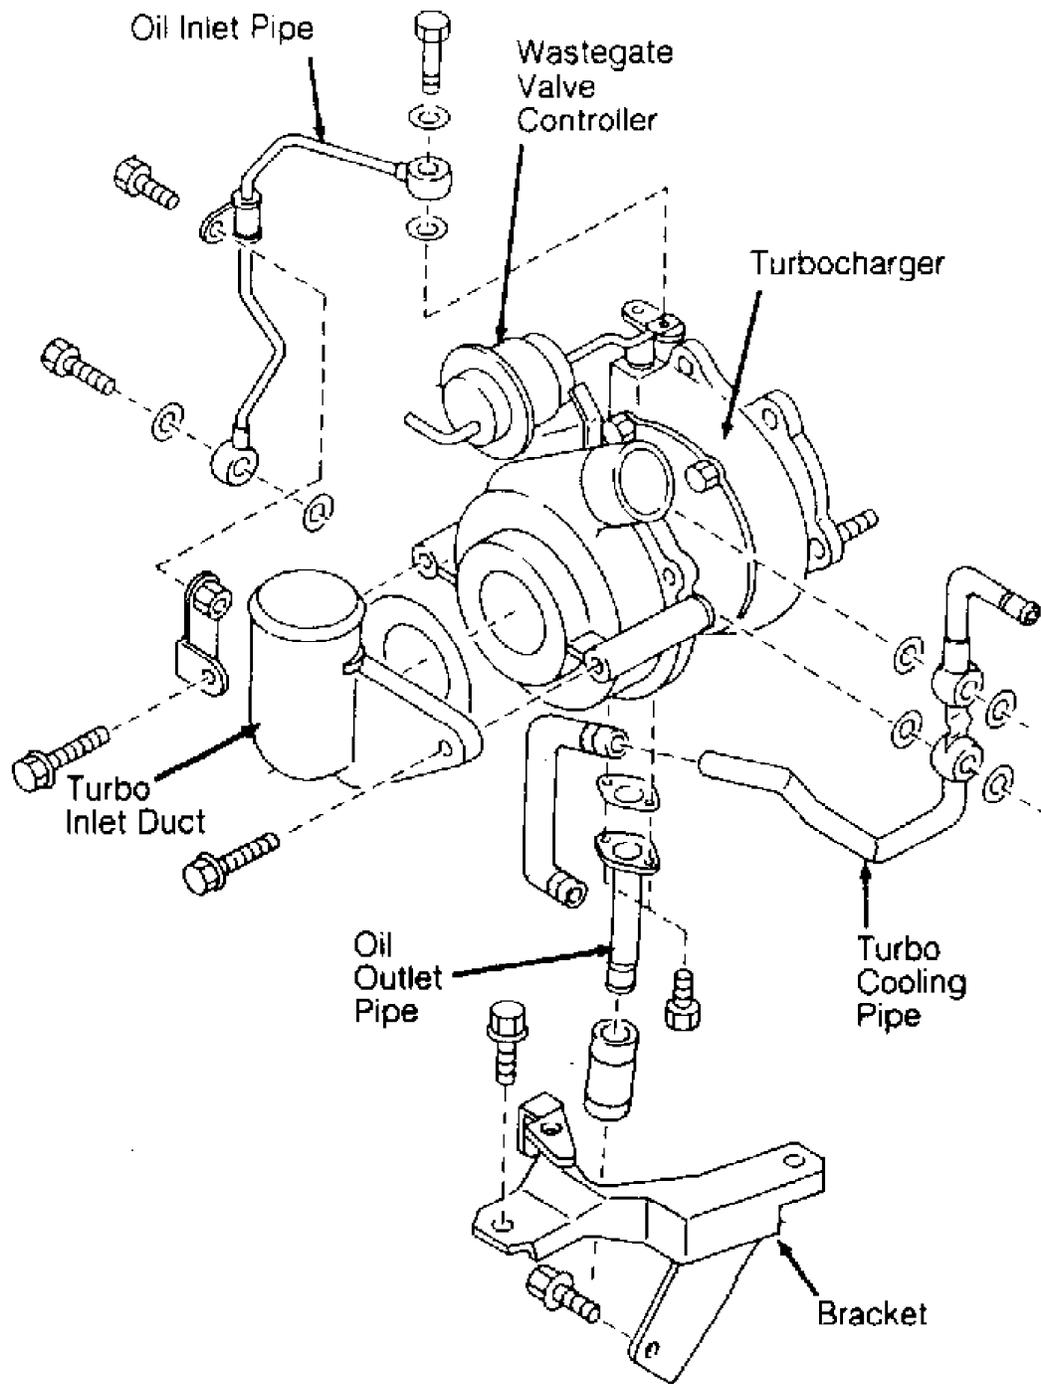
Exploded View Of Turbocharger Assembly (Legacy)
